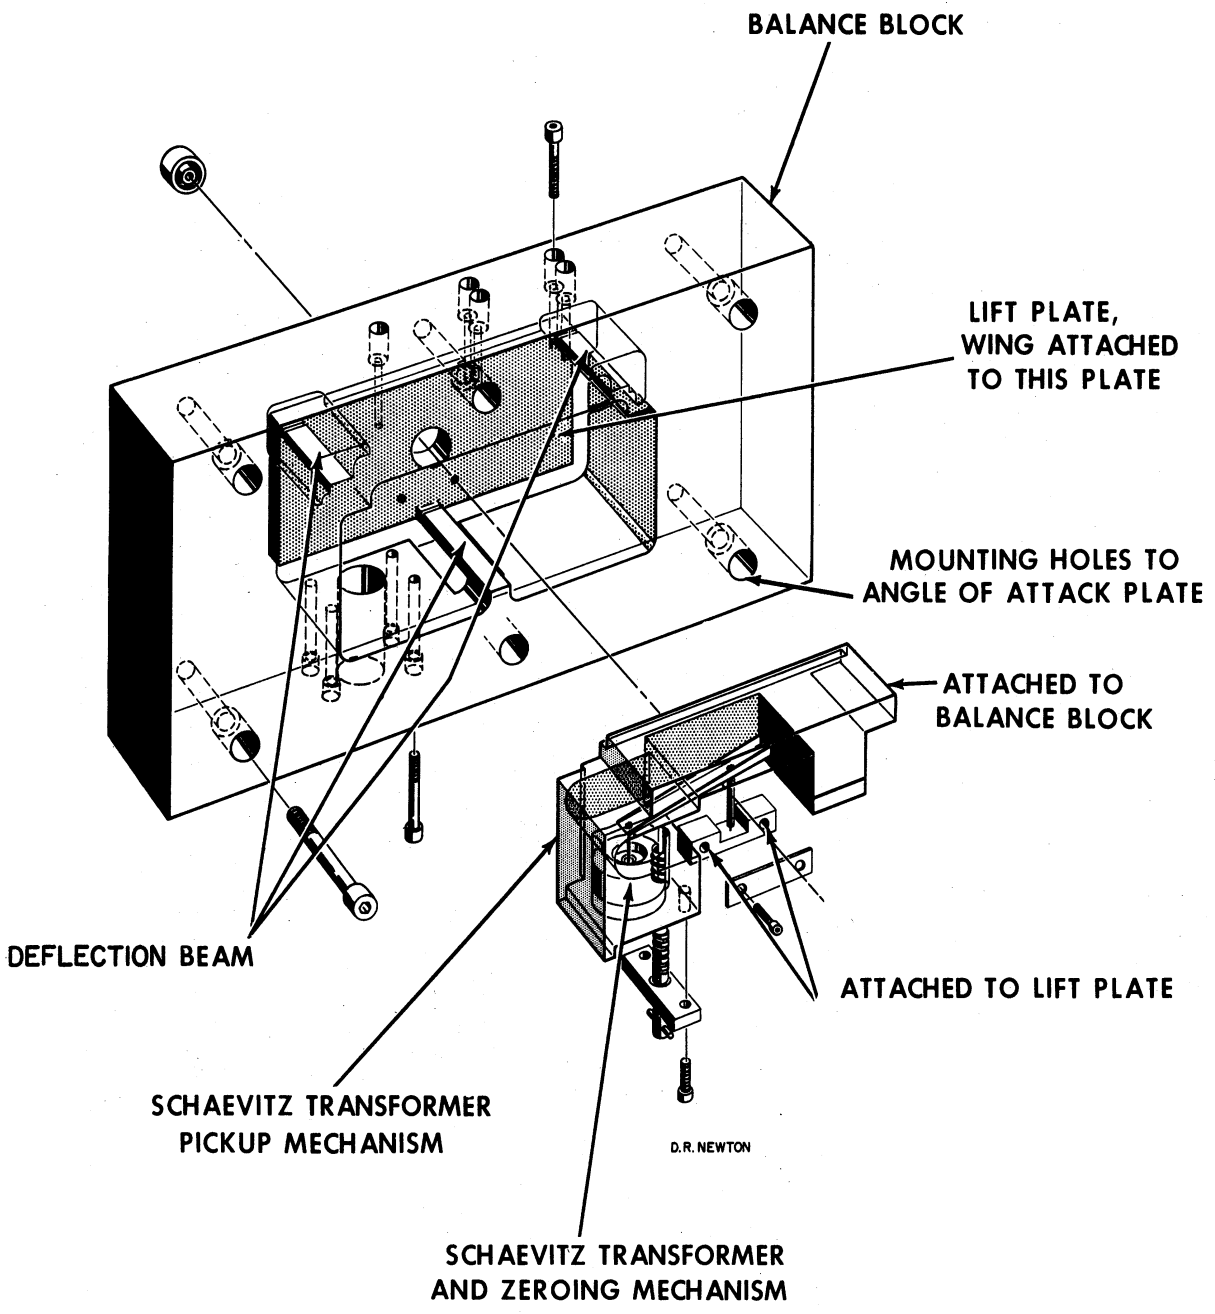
View Showing Deflection-Beam Block and Schaevitz Transformer Mounting.
